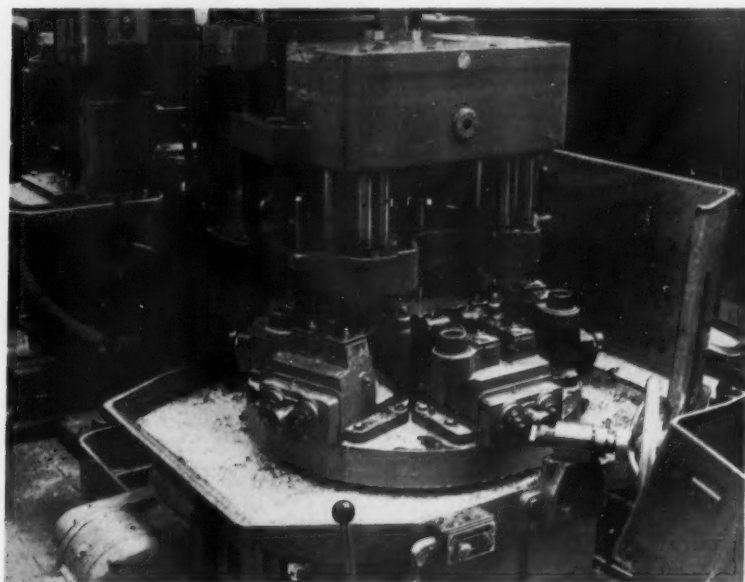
Pollard machine for drilling, reaming and counterboring connecting rod caps
